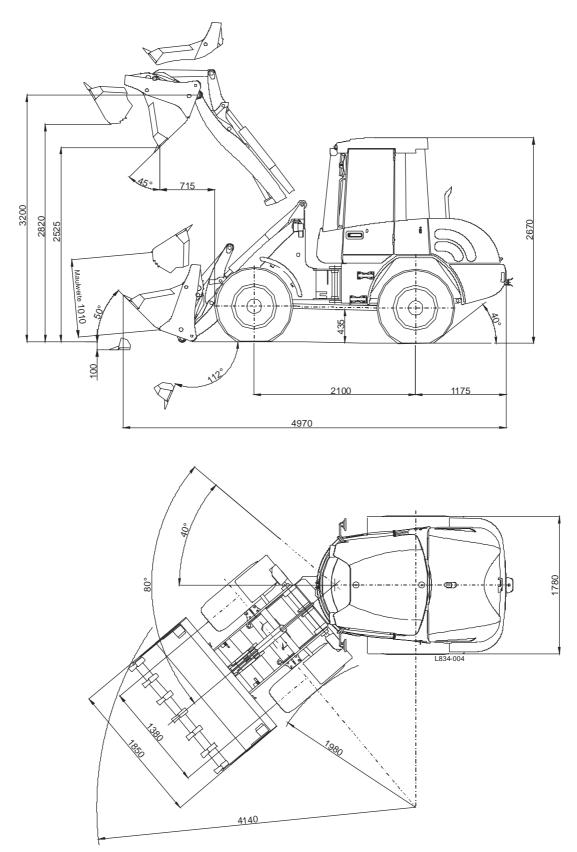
Dimensioned drawing, machine equipped with multi-purpose bucket and parallel-boom geometry 405/70 R18 tires
